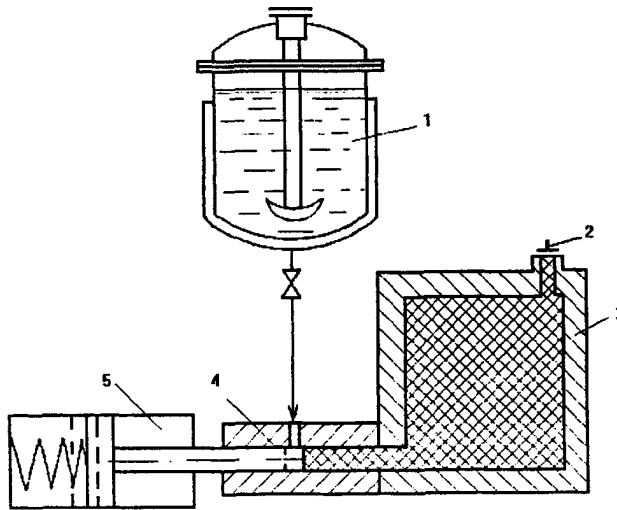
Scheme of the equipment used for reactive injection molding. 1 - reactor; 2 - safety-valve; 3 - mold; 4 - piston-rod; 5 - device for feeding a mold under pressure.
